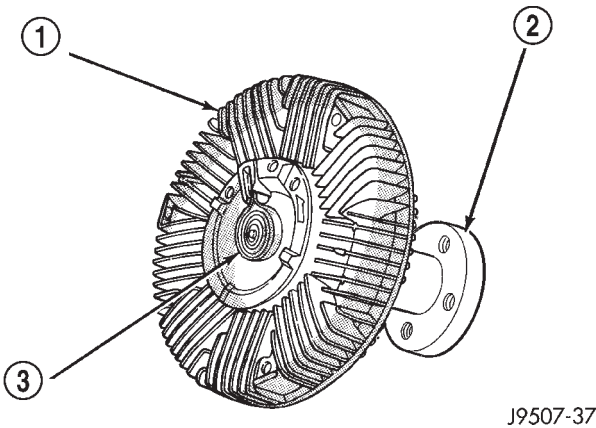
Water Pump Mounted Fan Drive—4.0L Engine
